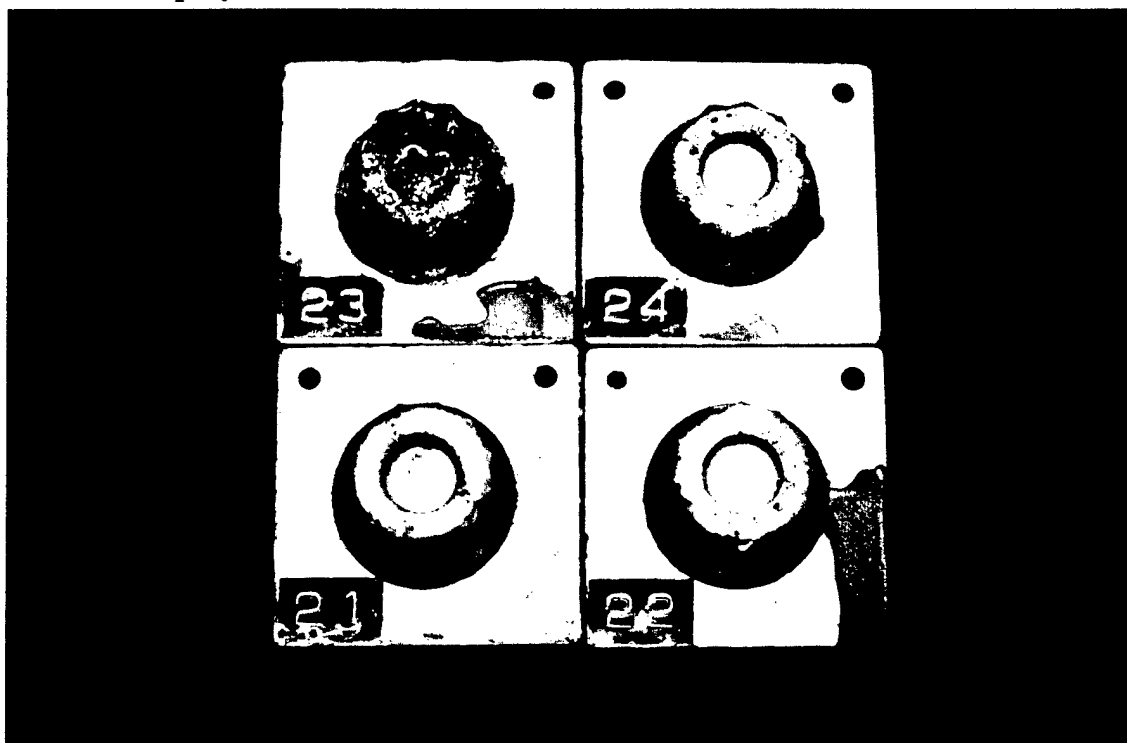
H11 Chromium Hot Work Tool Steel Bolt Heads With Cadmium Electroplate After 62 Days of Salt Spray. Reduced 25%.
